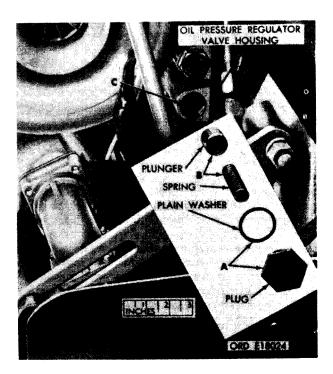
REMOVING, INSTALLING, AND INSPECTING PISTON OIL COOL-ING NOZZLE OIL PRESSURE RELIEF VALVE.
